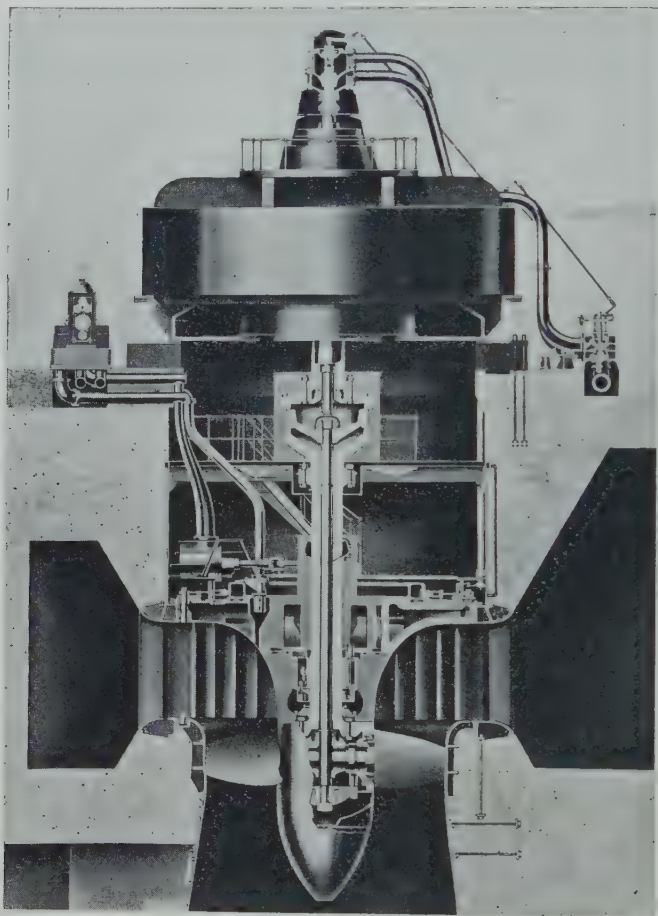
Safe Harbor Development—220-in. Kaplan adjustable blade, propeller-type turbine. (Courtesy of S. Morgan Smith Company.)
